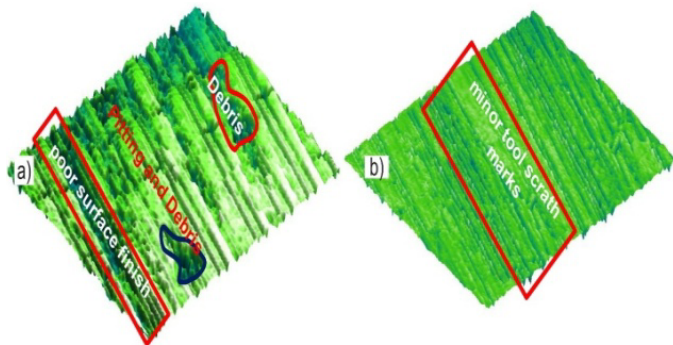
surface morphology of the machined surface a) 7th run b) 8th run
